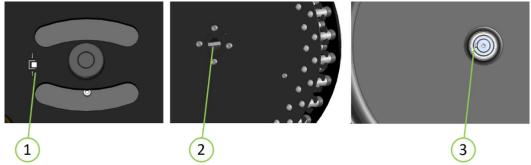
Left: Marking on top of the rotor disc. Middle: Groove shown from underneath the rotor disc. Right: Tongue included in the rotor axis visible after rotor disc is removed
